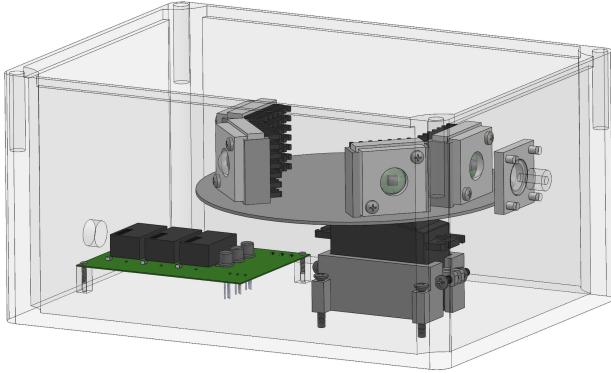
Complete view of the motor unit, with components housed inside a 3D printed box.
